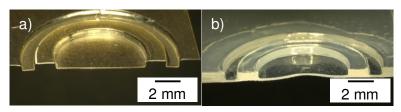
Cuts through ultrasonically thermoformed PEEK-foil (a) and embossed PE-buffer foils (b) [49].
